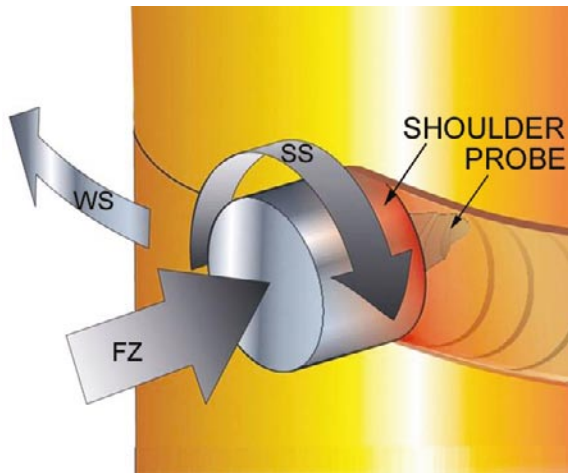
Friction stir welding (*SS=tool rotation speed, WS=welding speed, and FZ=axial force*).
